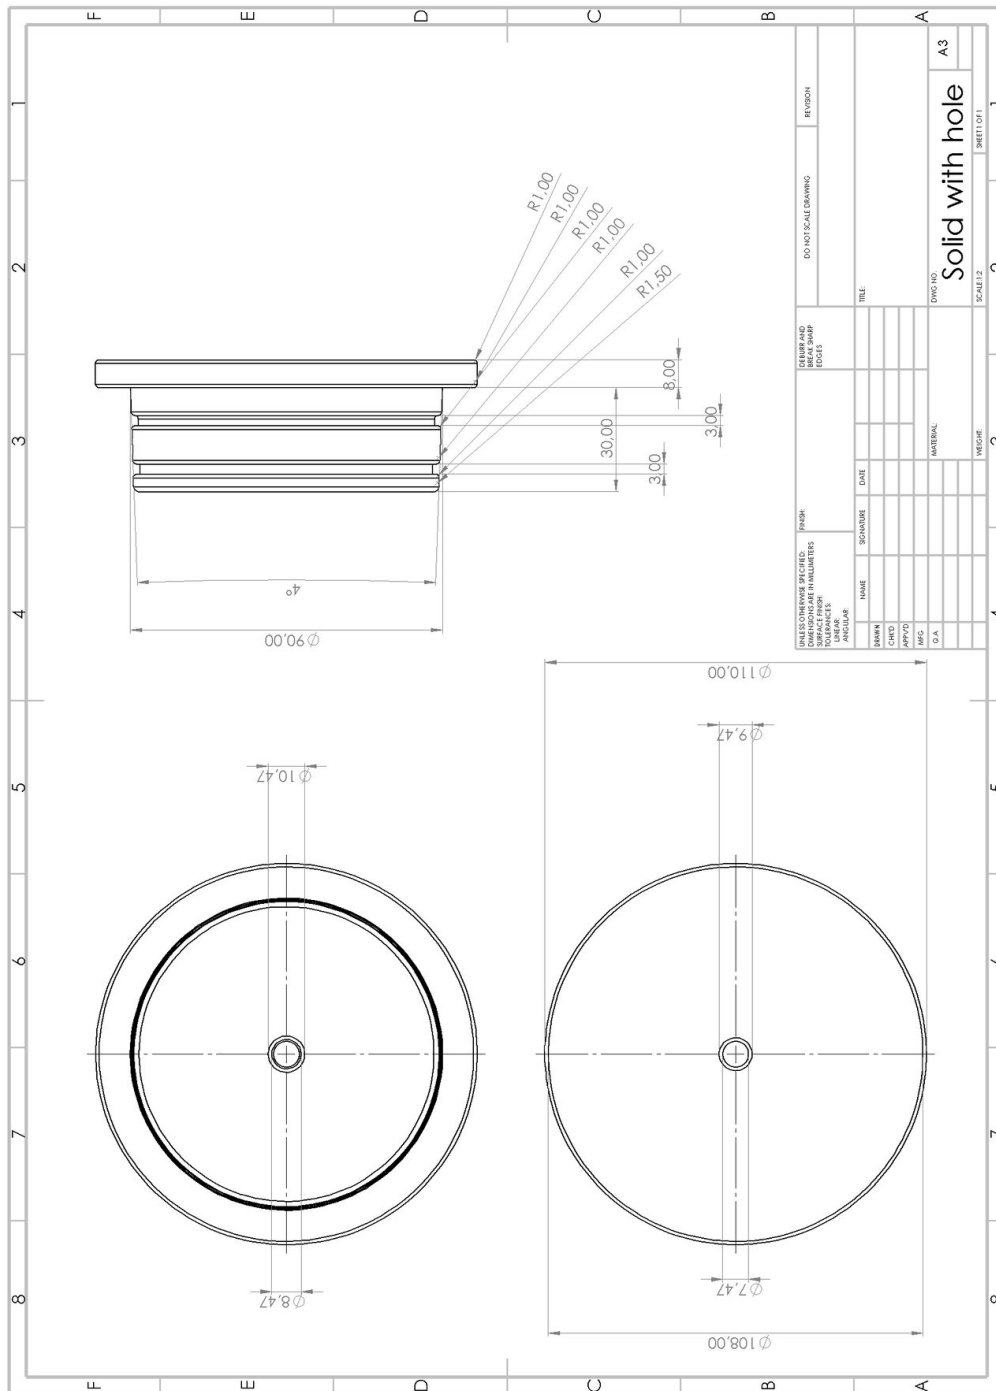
Solidworks drawing of the closing disk for the solid cylinder, with the air supply hole
